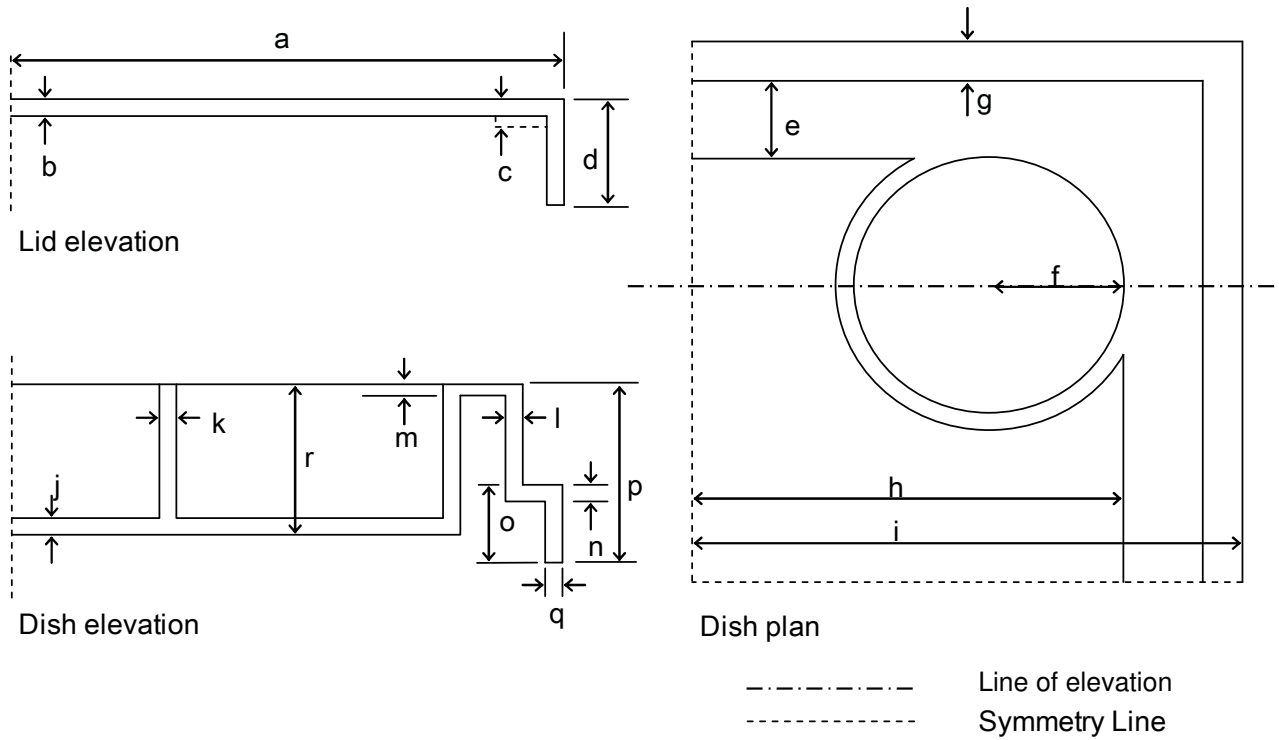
A plan and elevation of one quarter of a 4-well dish, and the elevation of its lid. Dimensions are defined in Table 6.1.
